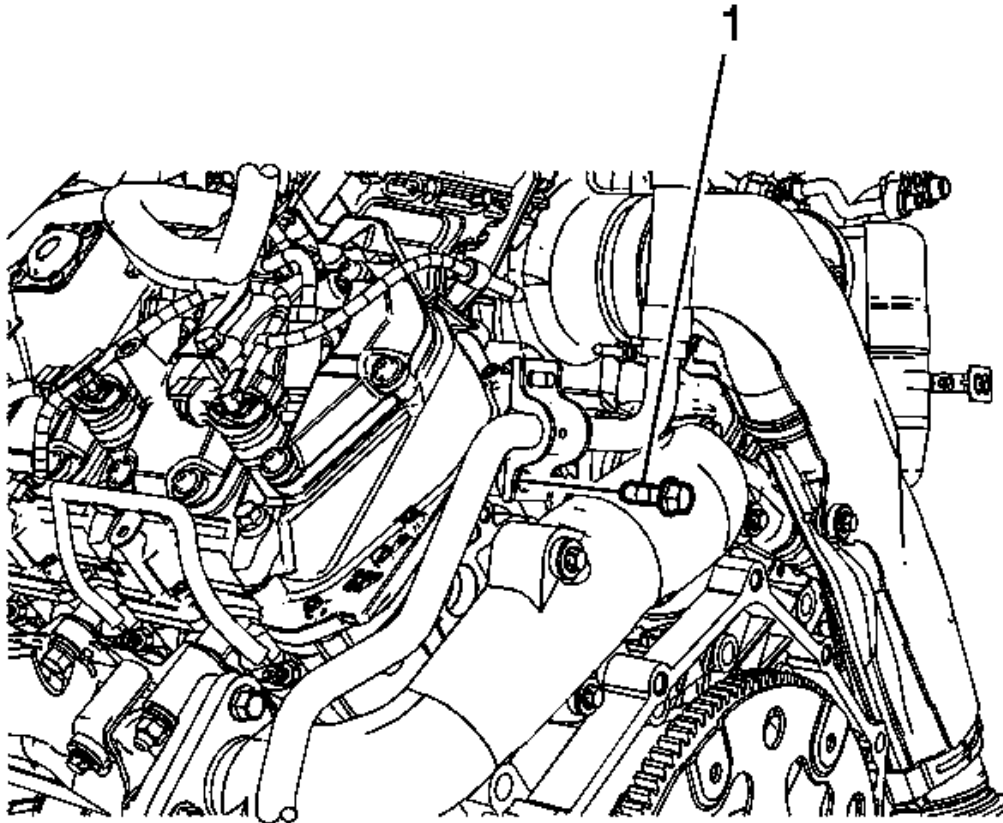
Identifying EGR Cooler Pipe Bolt & Bracket
